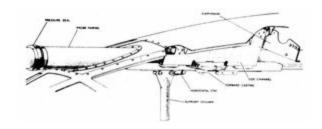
Boeing B-29 Superfortress receiver, forward probe mounting
